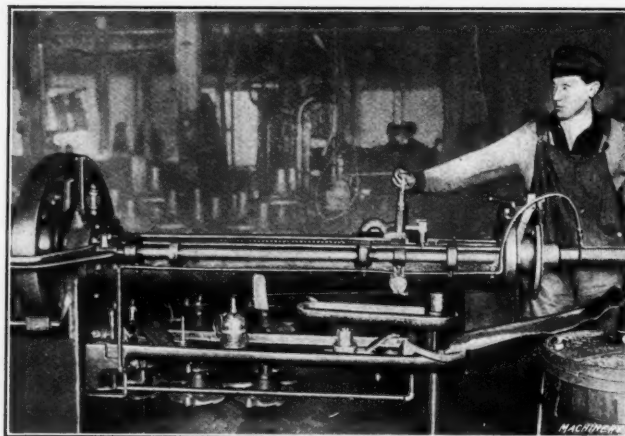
Broaching Brake Supports in Lapointe Machine Tool Co.'s Broaching Machine
